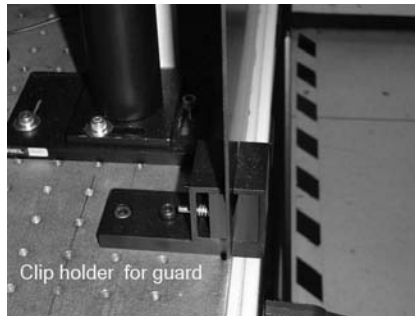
Clips holding perimeter guard (metal sheets).
